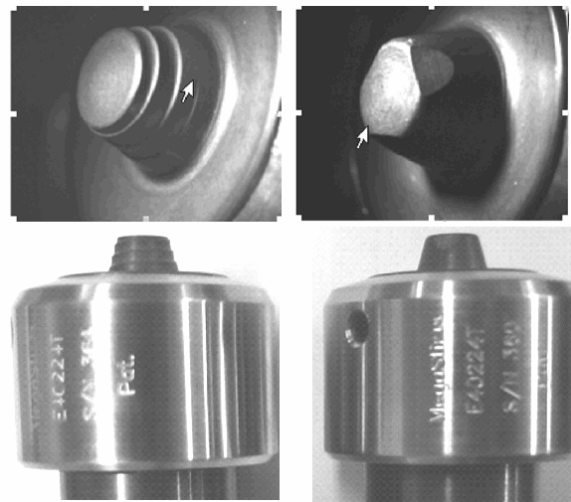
Stepped Spiral tools and Three Flat tools were fabricated in W-25%Re, and Stepped Spiral tools were fabricated in PCBN for use in the program.
